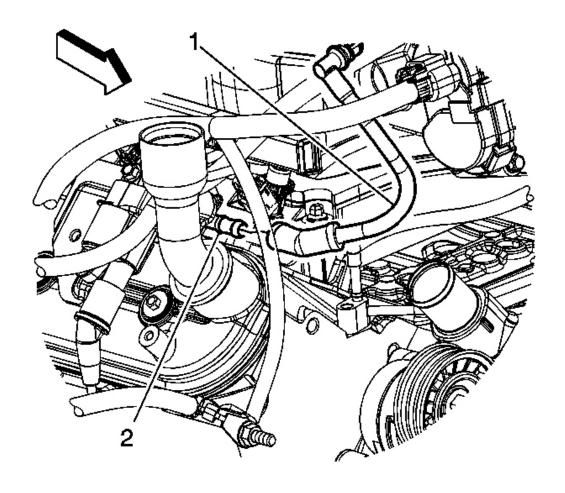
PCV Hose/Tube Courtesy of GENERAL MOTORS CORP.
